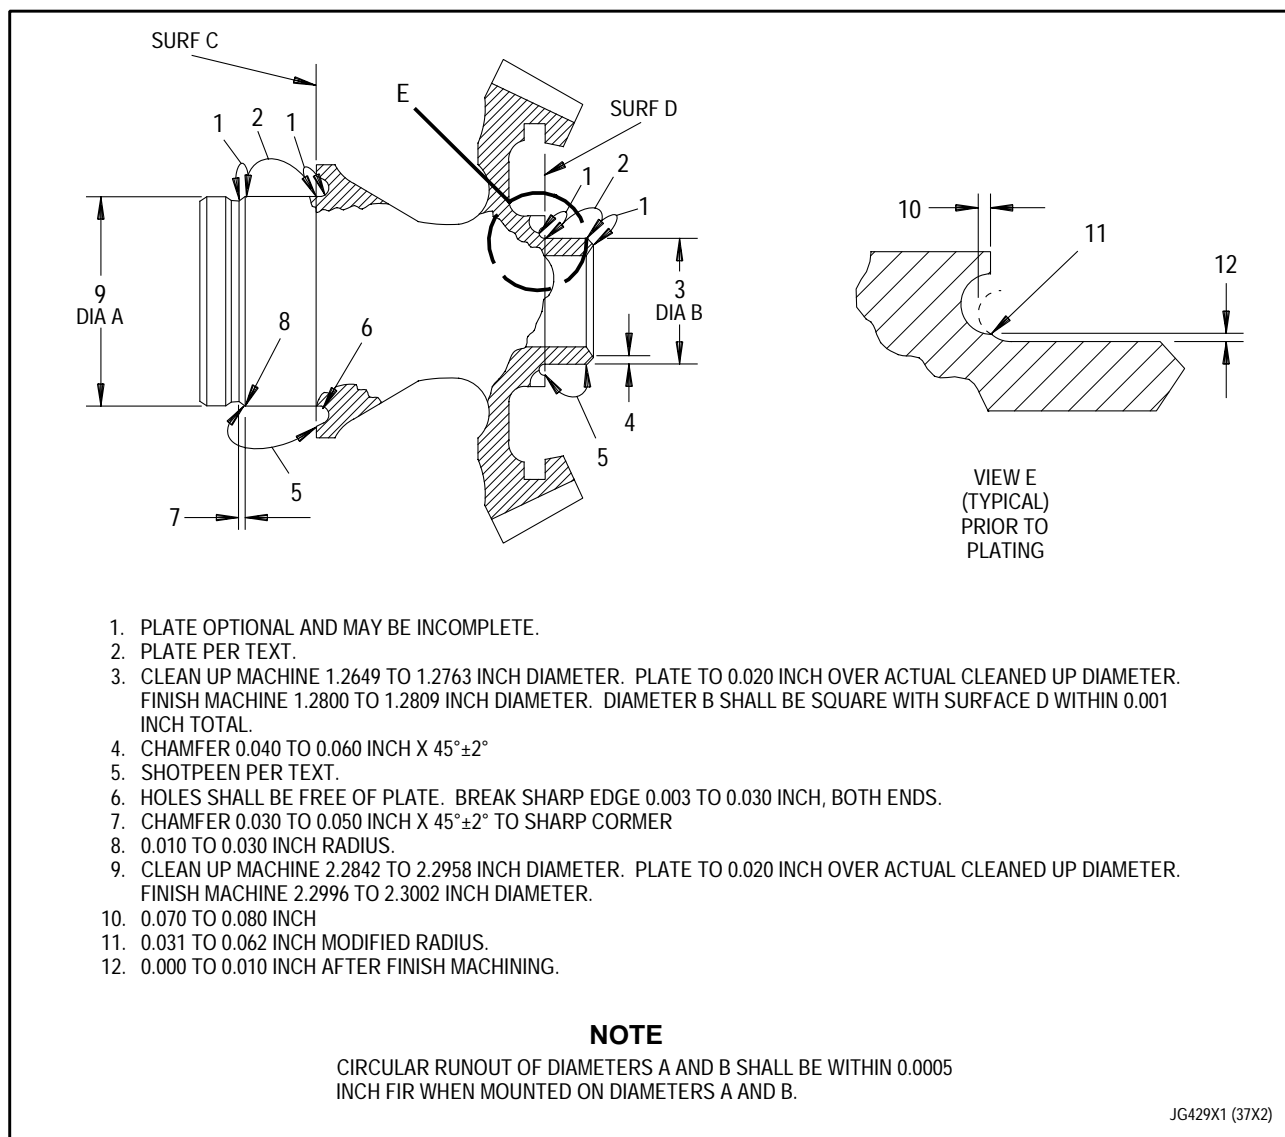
Gearbox Drive Bevel Gearshaft (38 Teeth) - Bearing Journal Repair
